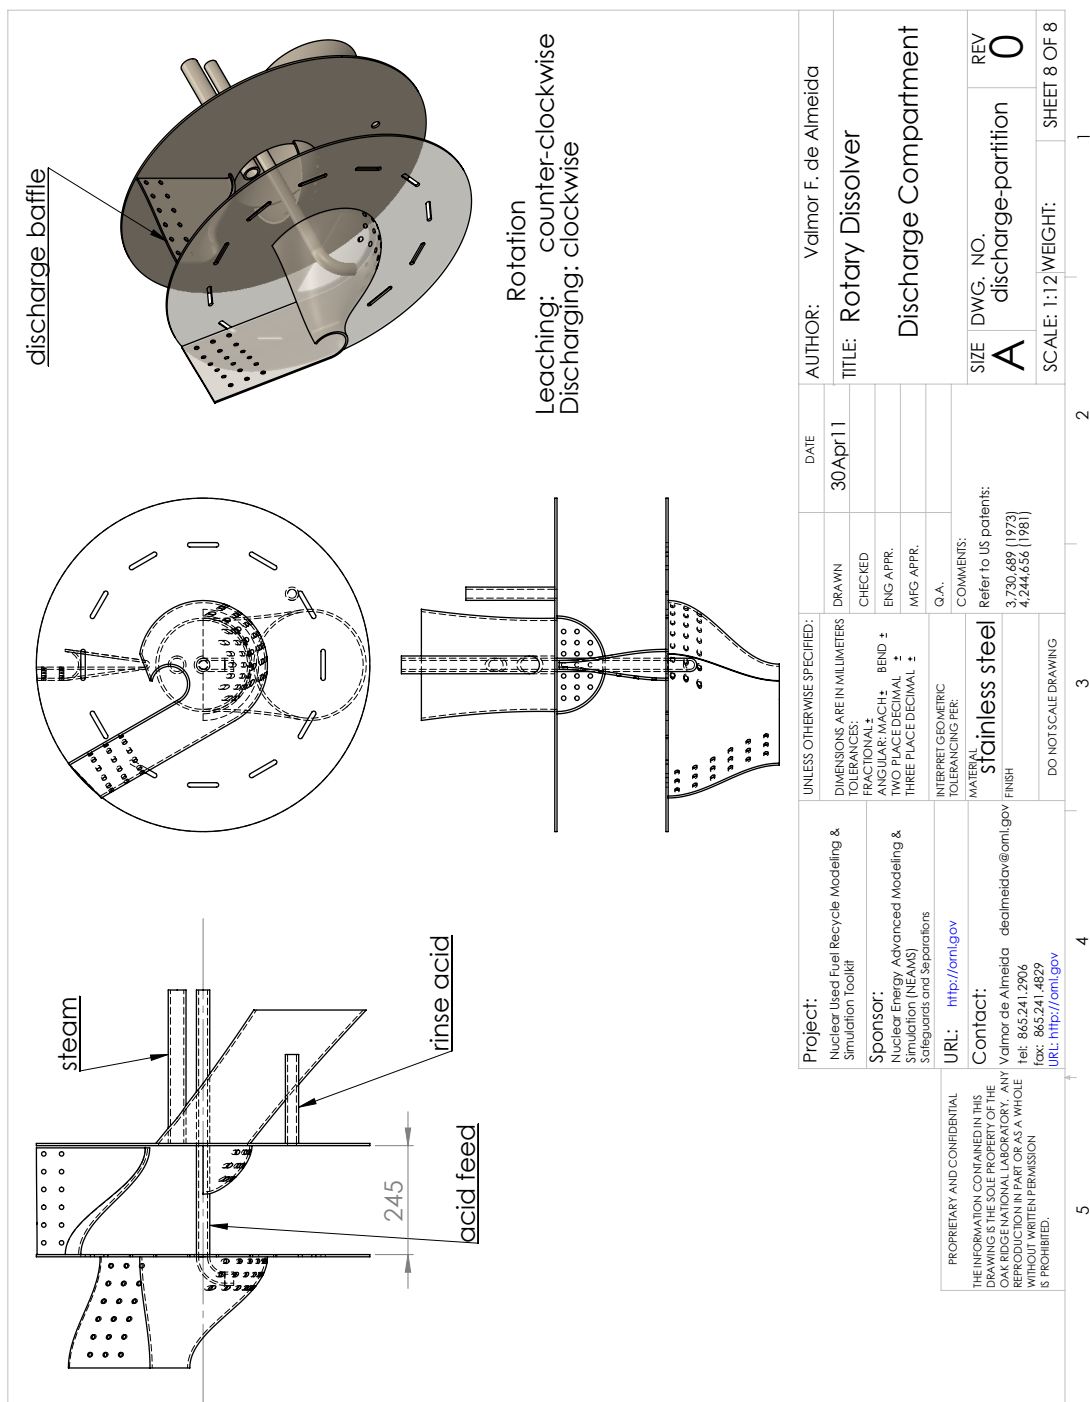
Rotary dissolver CAD discharge compartment drawing.
